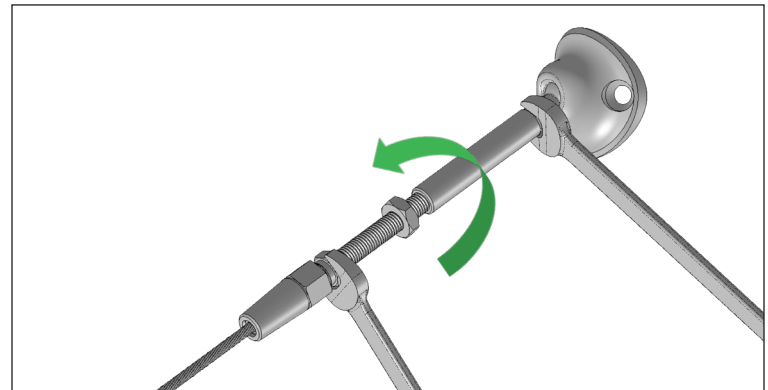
Figure I. Tension by holding the threaded stud in a fixed position with a 3/8" wrench while rotating the tensioner body using a 7/16" wrench.
